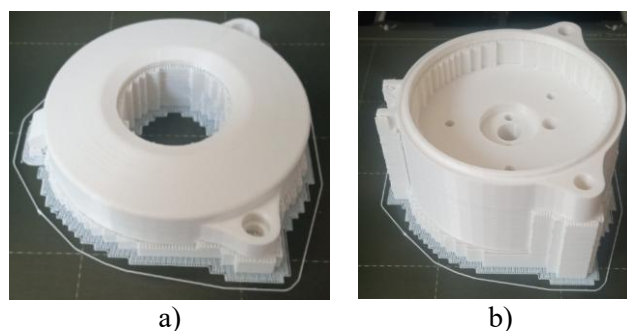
Form of the printed elements: a) cover with a hole and b) central part
